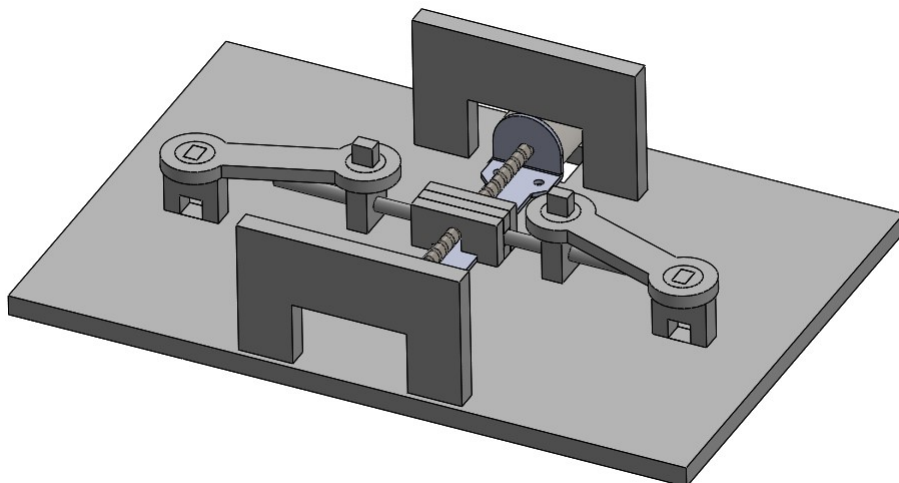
Initial z-axis mechanism converting linear motion into rotational
